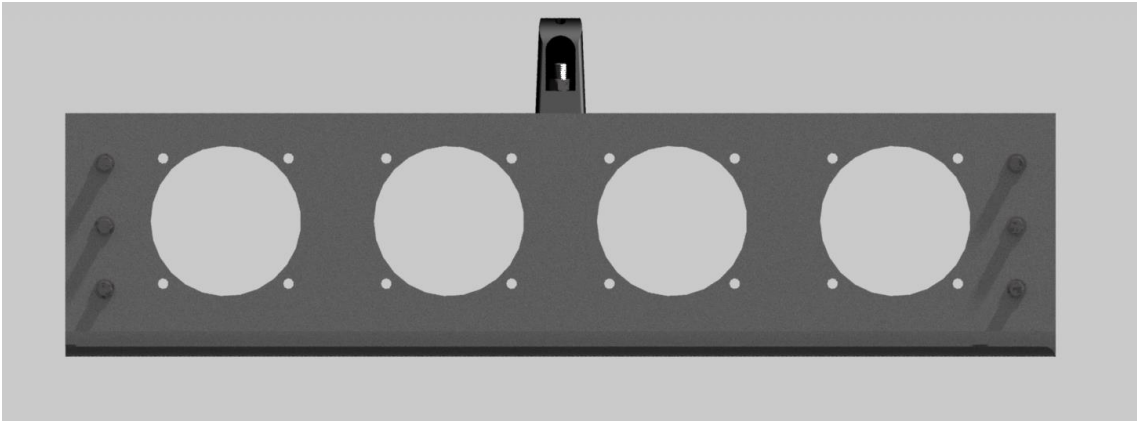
The side-view of the fully assembled ESS enclosure.
